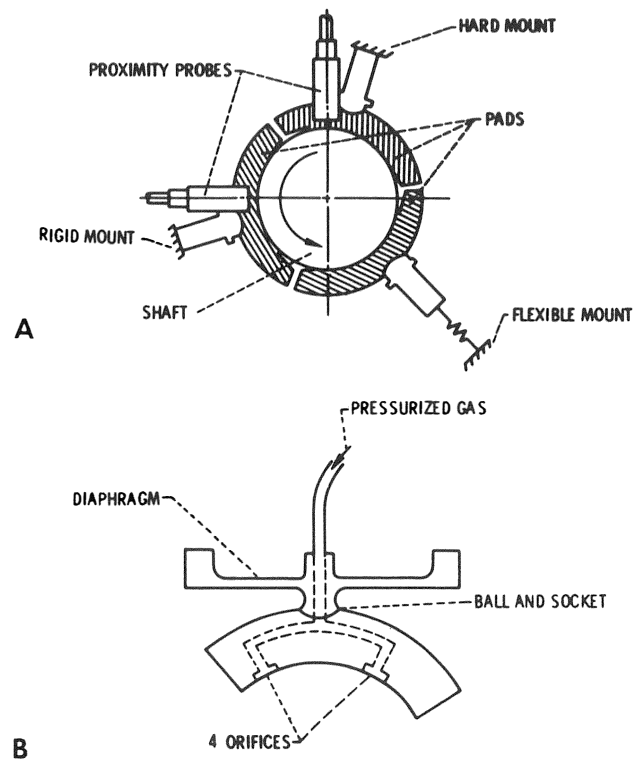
Gas Lubricated Tilting-Pad Journal Bearing with Hydrostatic Lifts. (a) Bearing Arrangement, and (b) Pad Pivot Arrangement.
